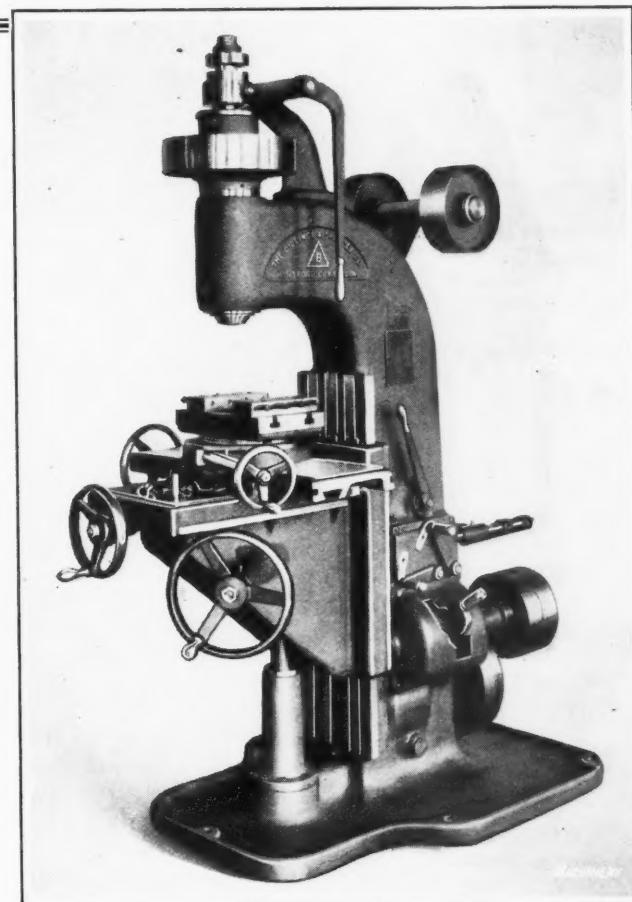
Die-sinking Machine brought out by the Billings & Spencer Co.
